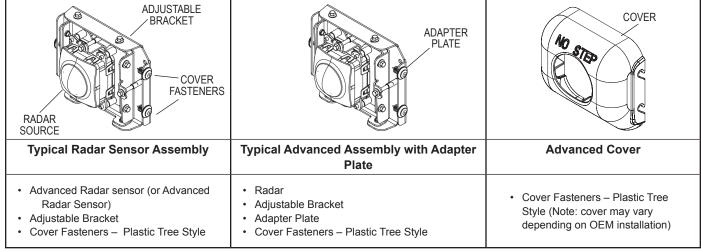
TYPICAL ADVANCED ASSEMBLIES AND COVER WITH SERVICE REPLACEMENT PARTS
